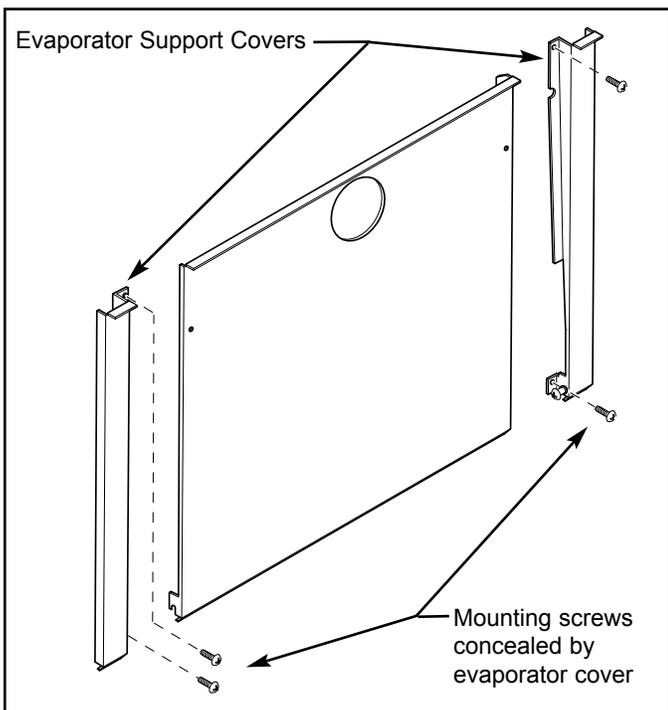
Refrigerator Evaporator Support Cover Removal
